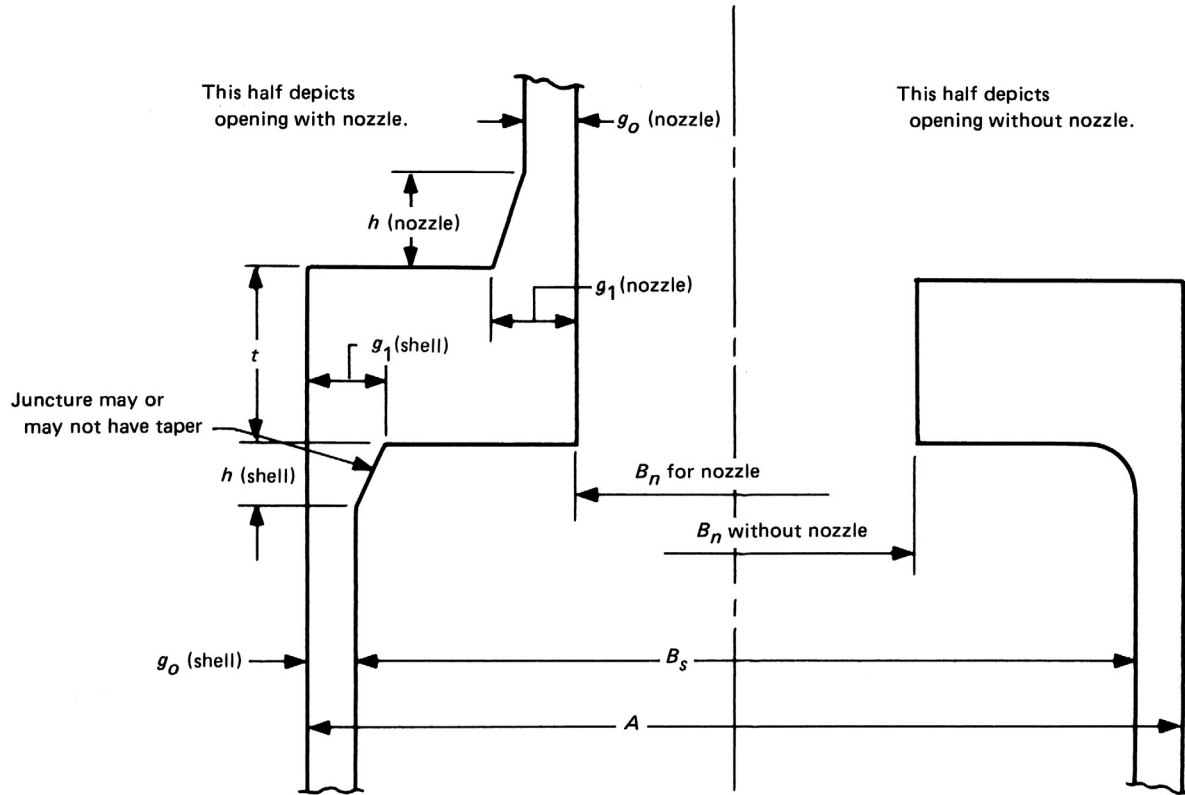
INTEGRAL FLAT HEAD WITH LARGE CENTRAL OPENING
